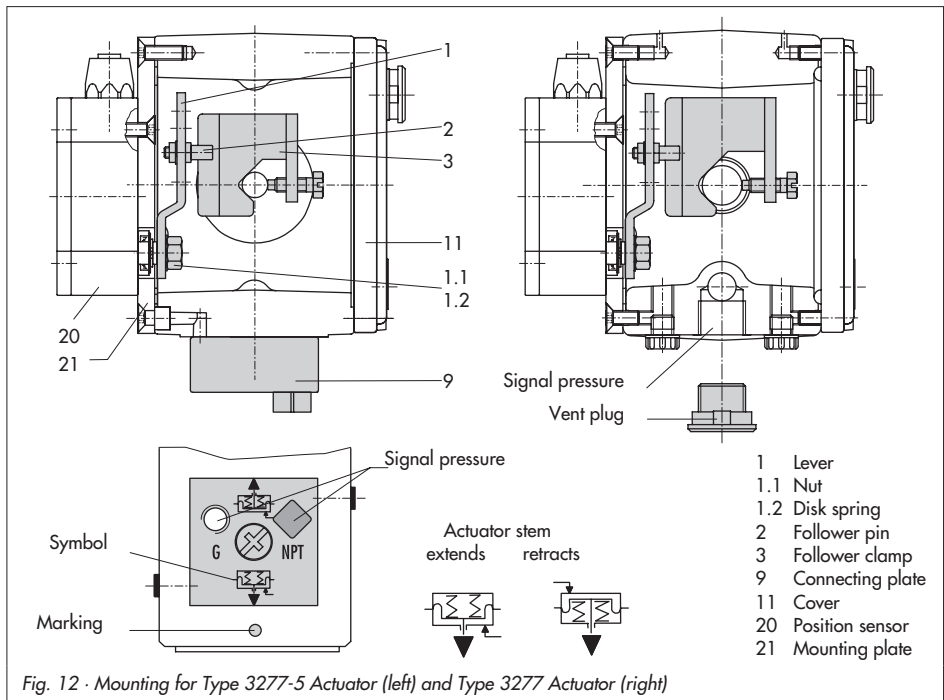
· Mounting for Type 3277-5 Actuator (left) and Type 3277 Actuator (right)
